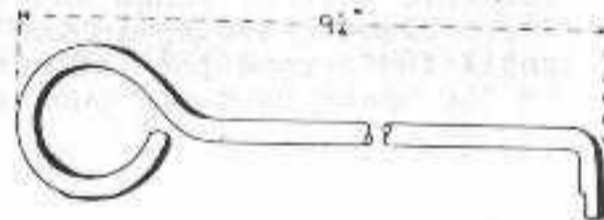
GEARBOX - TOOL REMOVING 1ST GEAR
